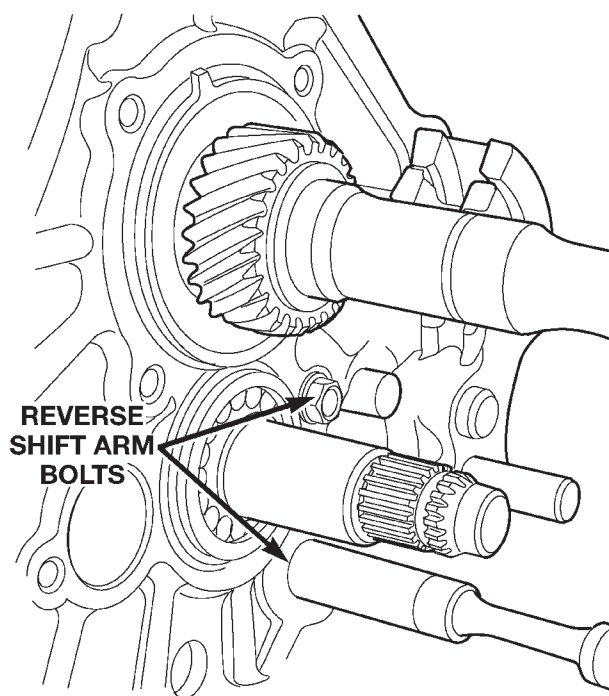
Remove Reverse Shift Arm Bracket Bolts
